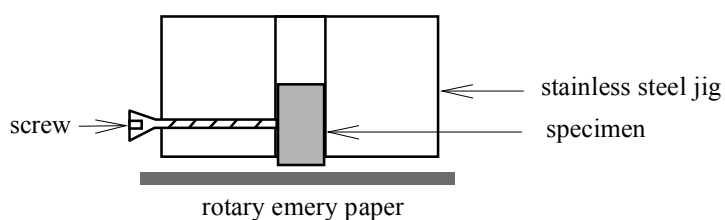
Grinding set-up used for producing flat surfaces when bonding in air.
